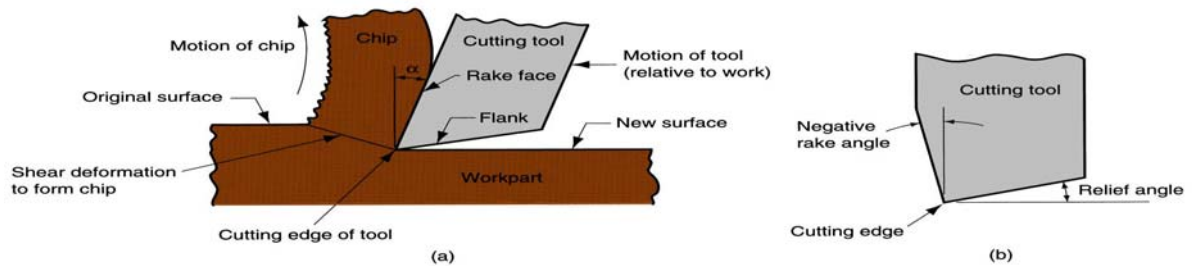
(a) A cross-sectional view of the machining process, (b) tool with negative rake angle; compare with positive rake angle in (a).
